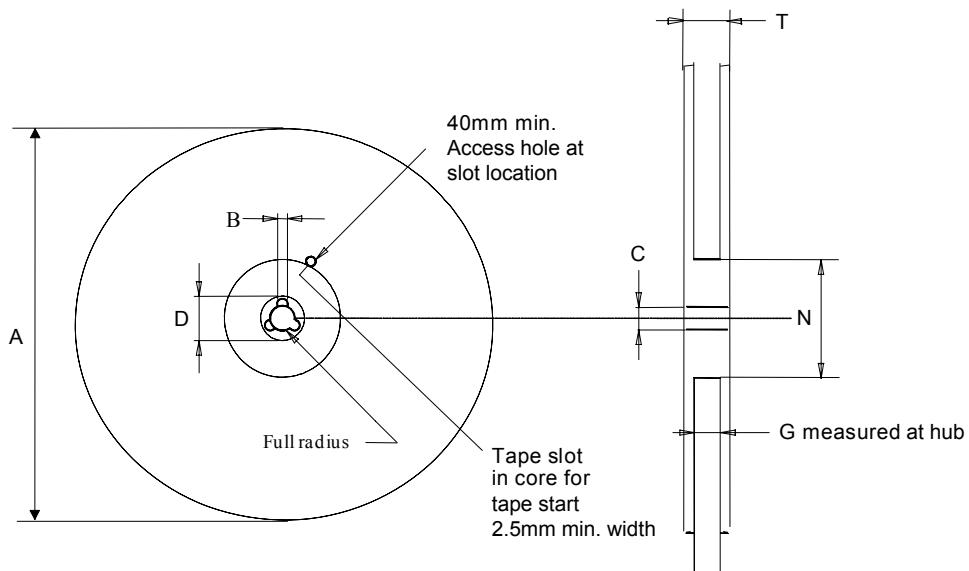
Reel information for carrier tape of LGA-14L packageTable 548. Reel dimensions for carrier tape of LGA-14L package
